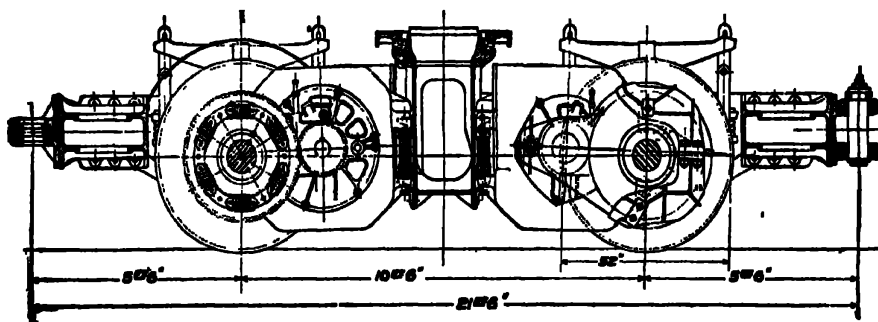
Details of Main Locomotive Truck, Showing Spring Gear and Spring Nose Suspension
